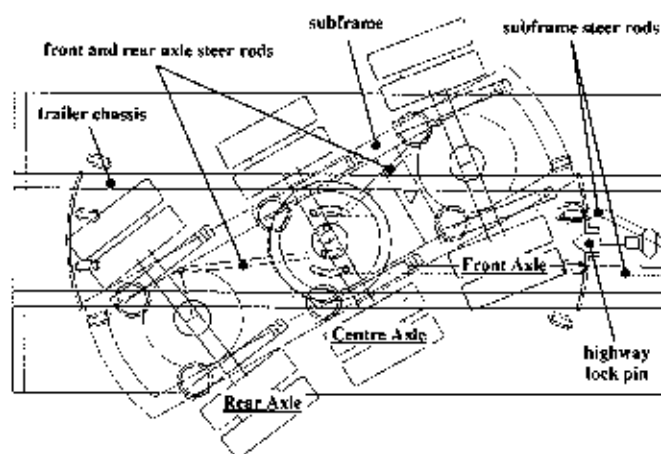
Schematic showing steer mechanisms between subframe and chassis, and front and rear axles and centre axle (adapted from drawings supplied by Gayat Pty Ltd).
